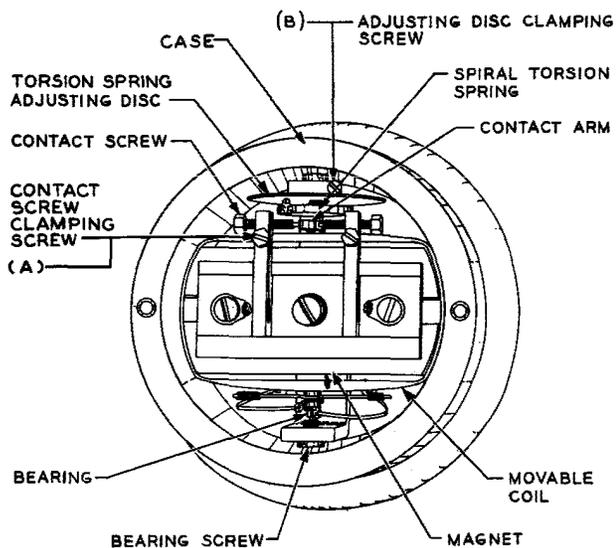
Western Electric 260 Type — Cover Removed (earlier relays having contact screw clamping screws)
